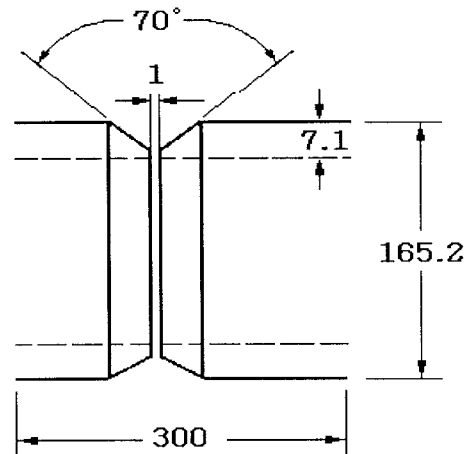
Schematic diagram of Welding groove of pipe
